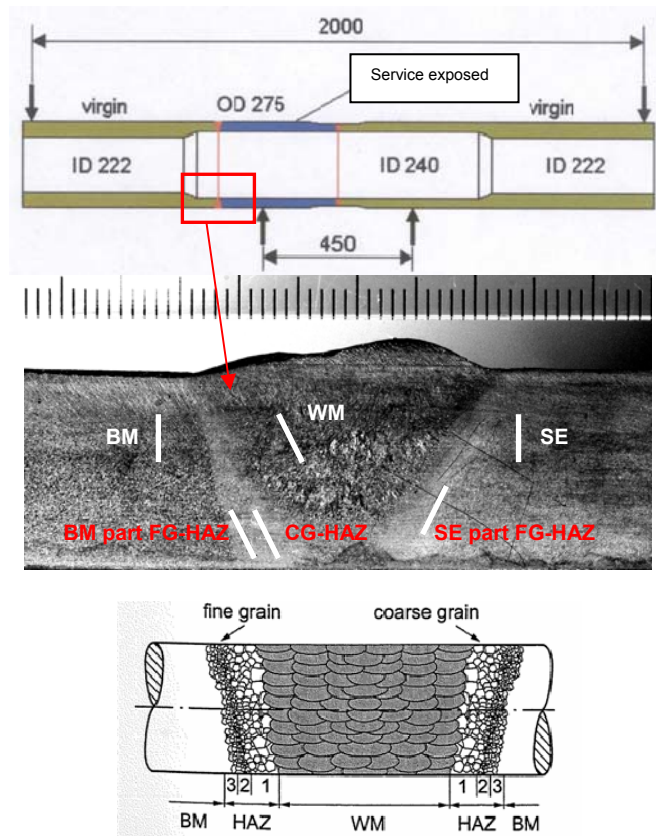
Schematic of the INTEGRITY pipe; Optical image of the welding zone; and schematic of the weldment microstructure
